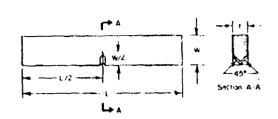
SLOW BEND FRACTURE TOUGHNESS SPECIMEN
